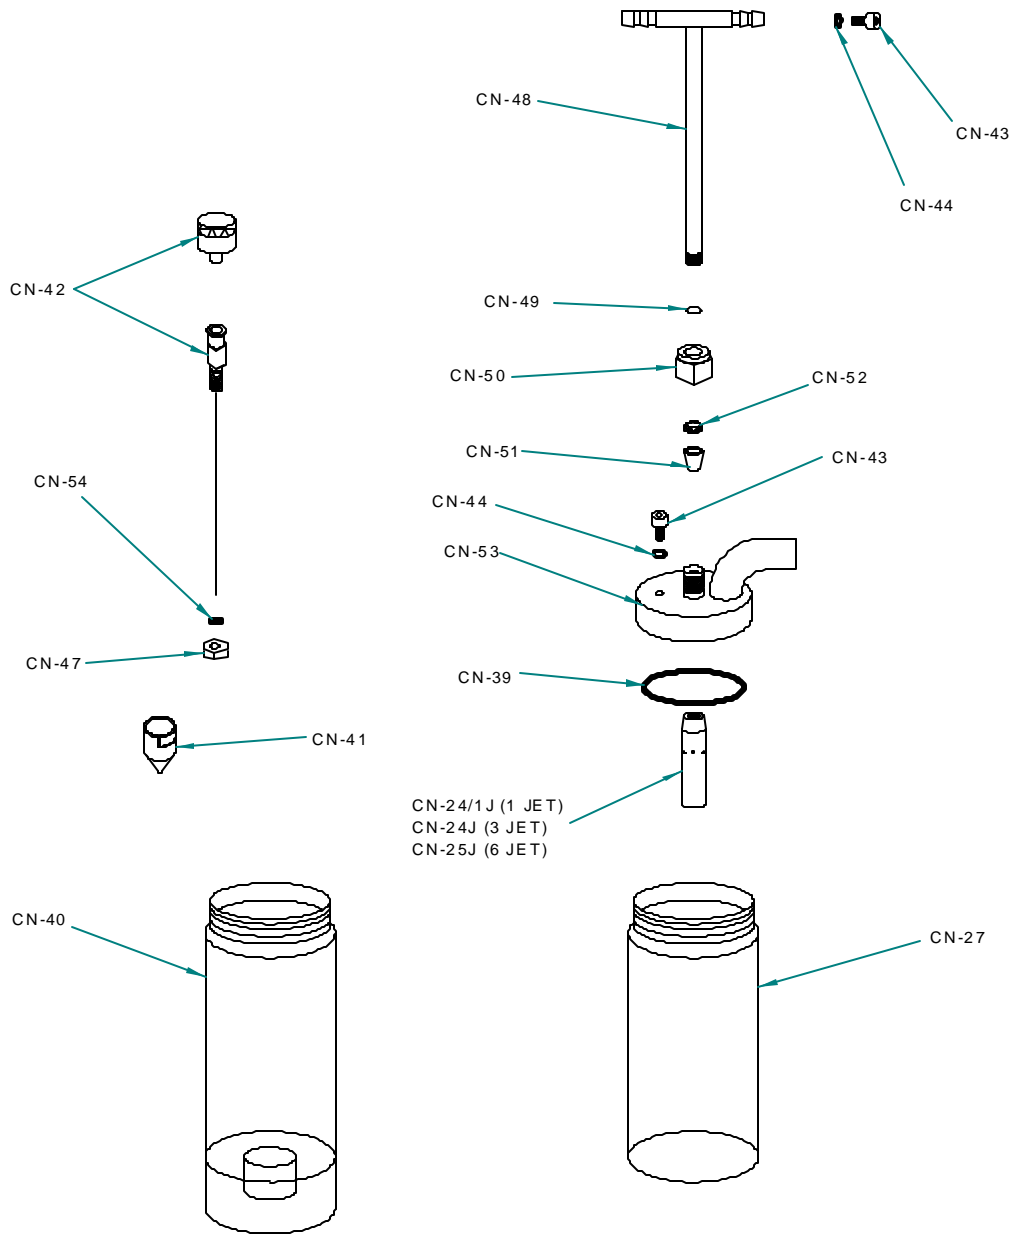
EXPLODED VIEW OF COLLISION NEBULIZER
